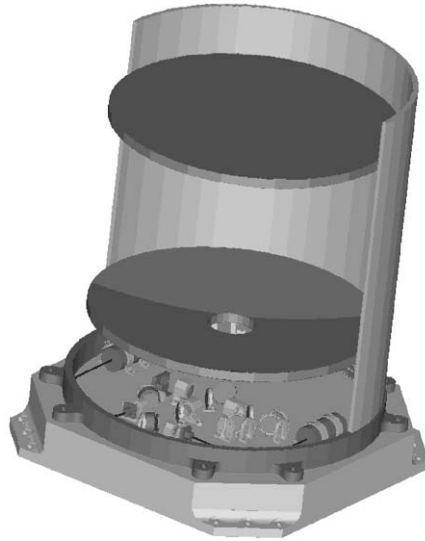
CAD drawing of the X2000 flight terminal design.
